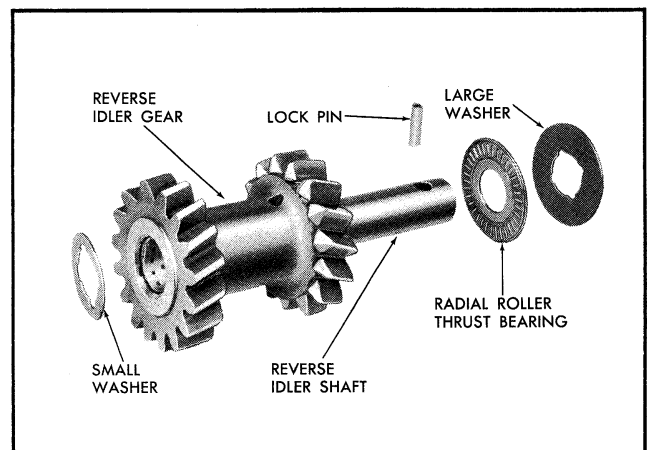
Reverse Idler Gear, Shaft and Thrust Washers
